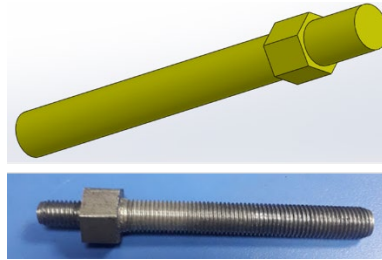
V-locators assembly sliding rod (the CAD model and the fabricated rod)
